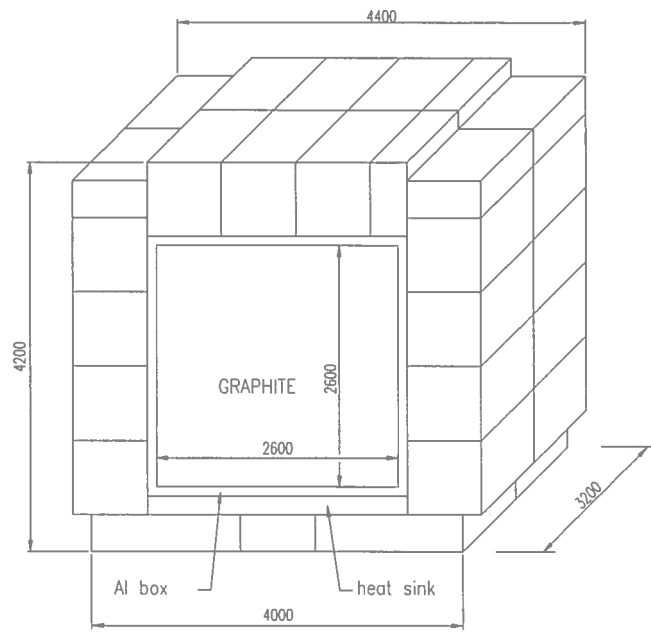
Beam view of the upstream end of the hadron stop (dimensions in millimetres)
